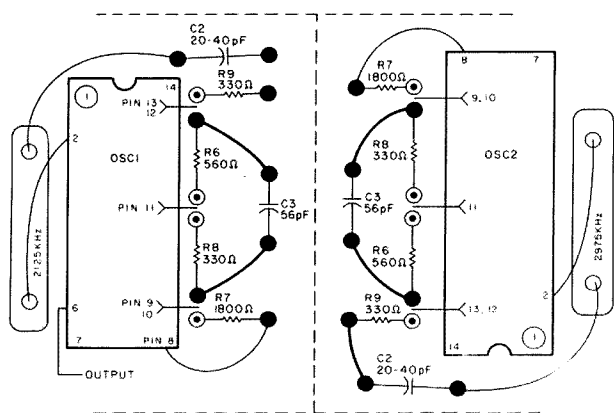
A pair of the oscillator circuits from the AFSK keyer board (exploded view from component side of board).
